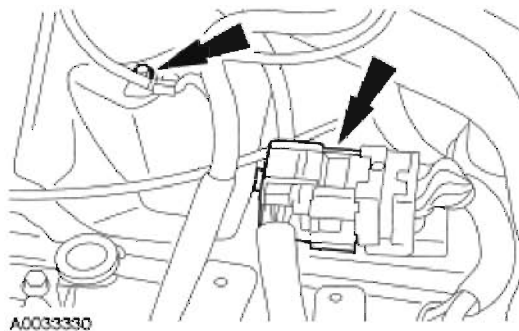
Locating Clutch Hydraulic Tube Fitting
